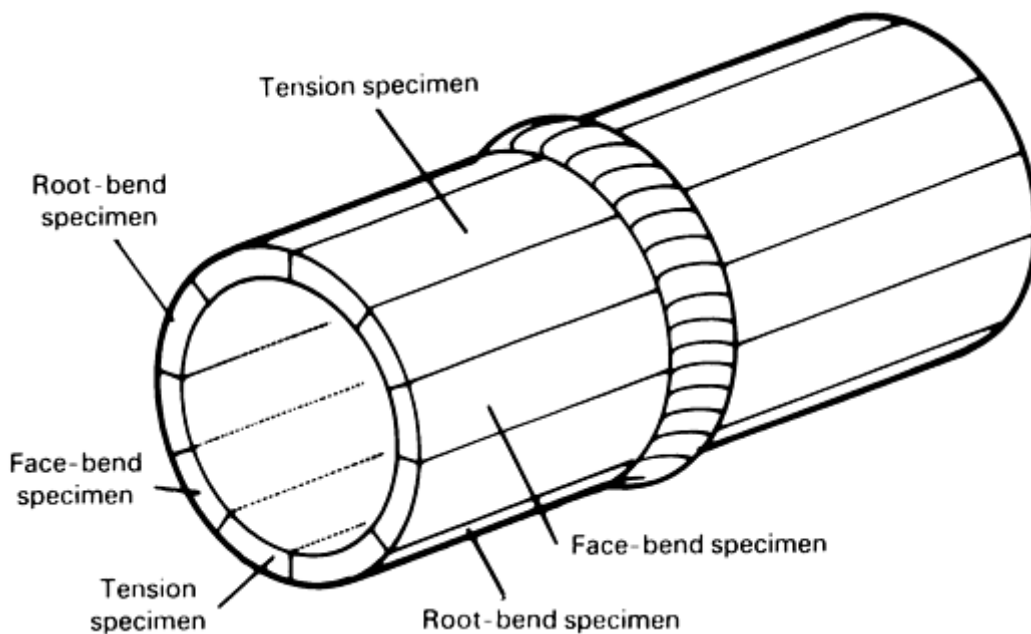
TYPICAL LOCATION OF TEST SPECIMENS FROM GROOVE WELDS IN BUTT-JOINT PIPE TEST
